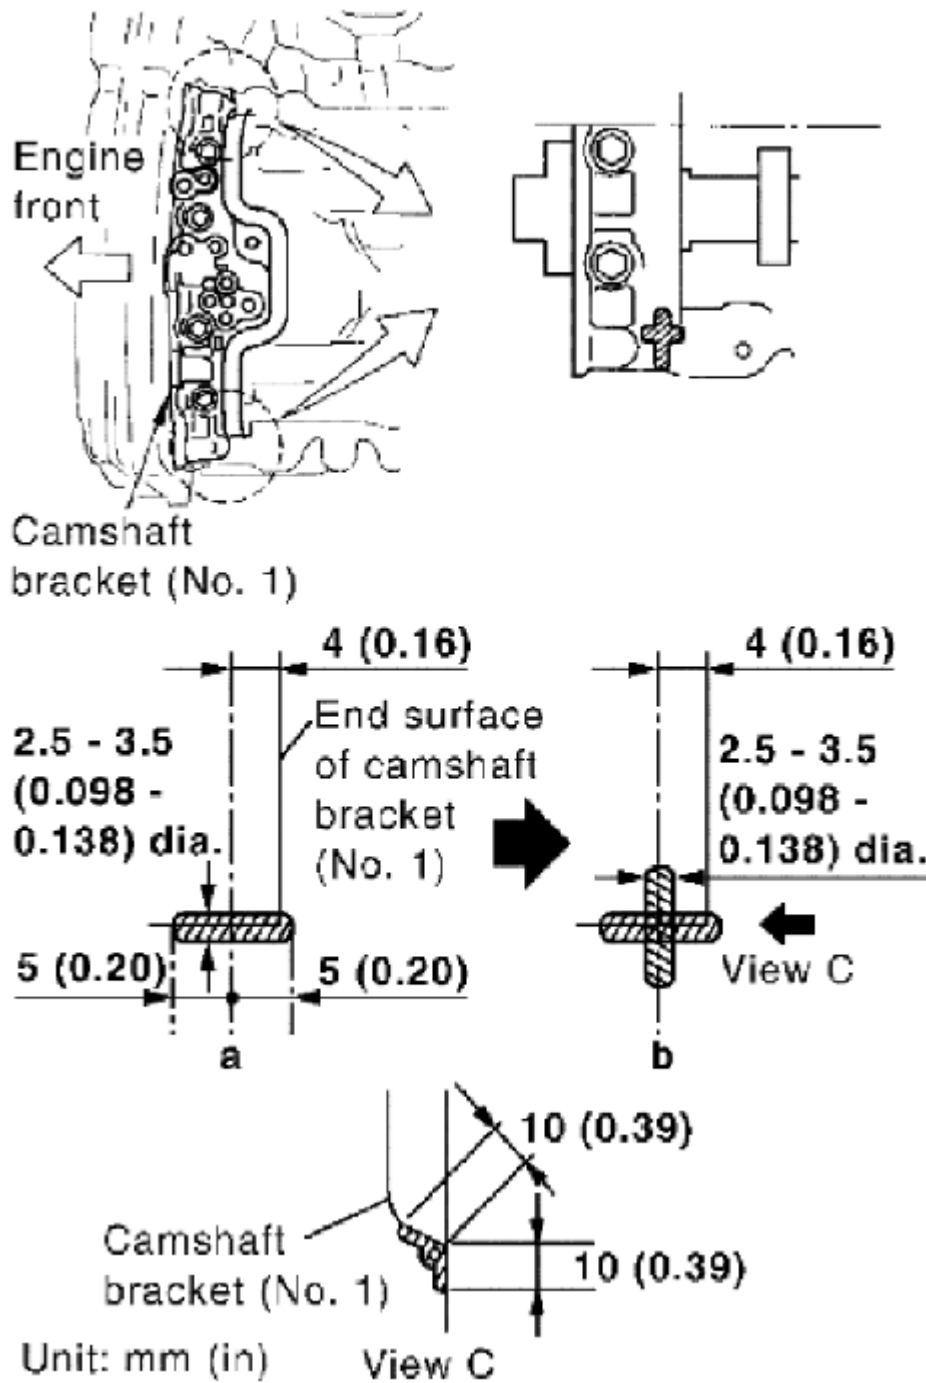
Applying Liquid Gasket Using Tool To Joint Of Rocker Cover, Cylinder Head And Camshaft Bracket
